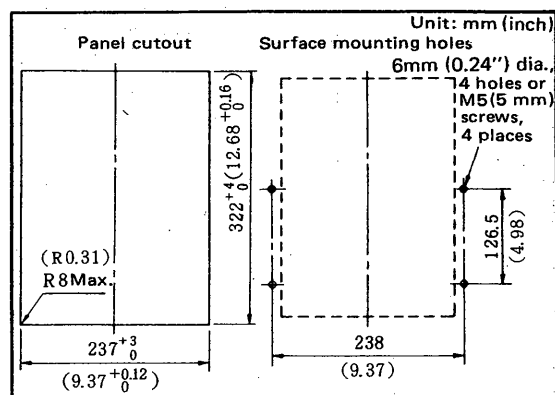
Panel Cutout and Surface Mounting Holes.
